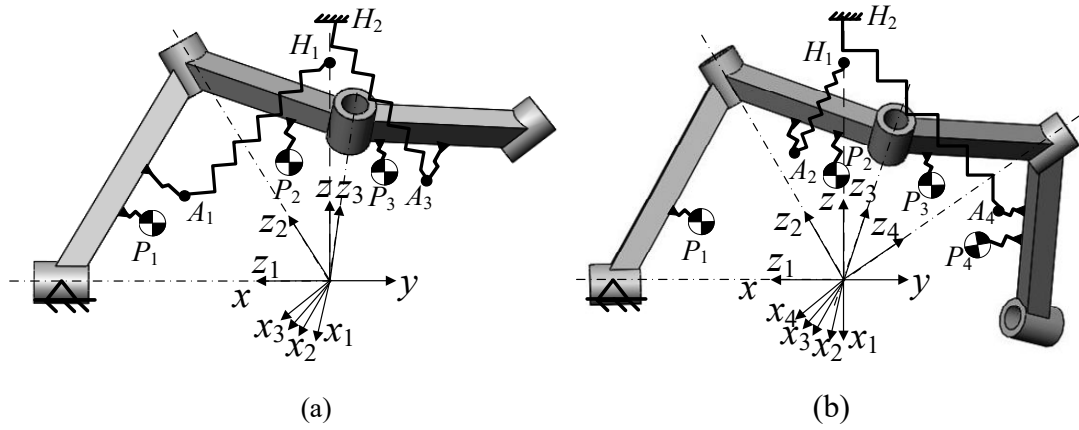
Static balancing of spherical manipulators with two springs: (a) 3-link manipulator; (b) 4-link manipulator
